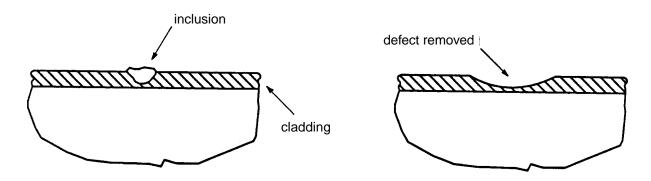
REPAIR OF TYPE 6 DEFECTS
